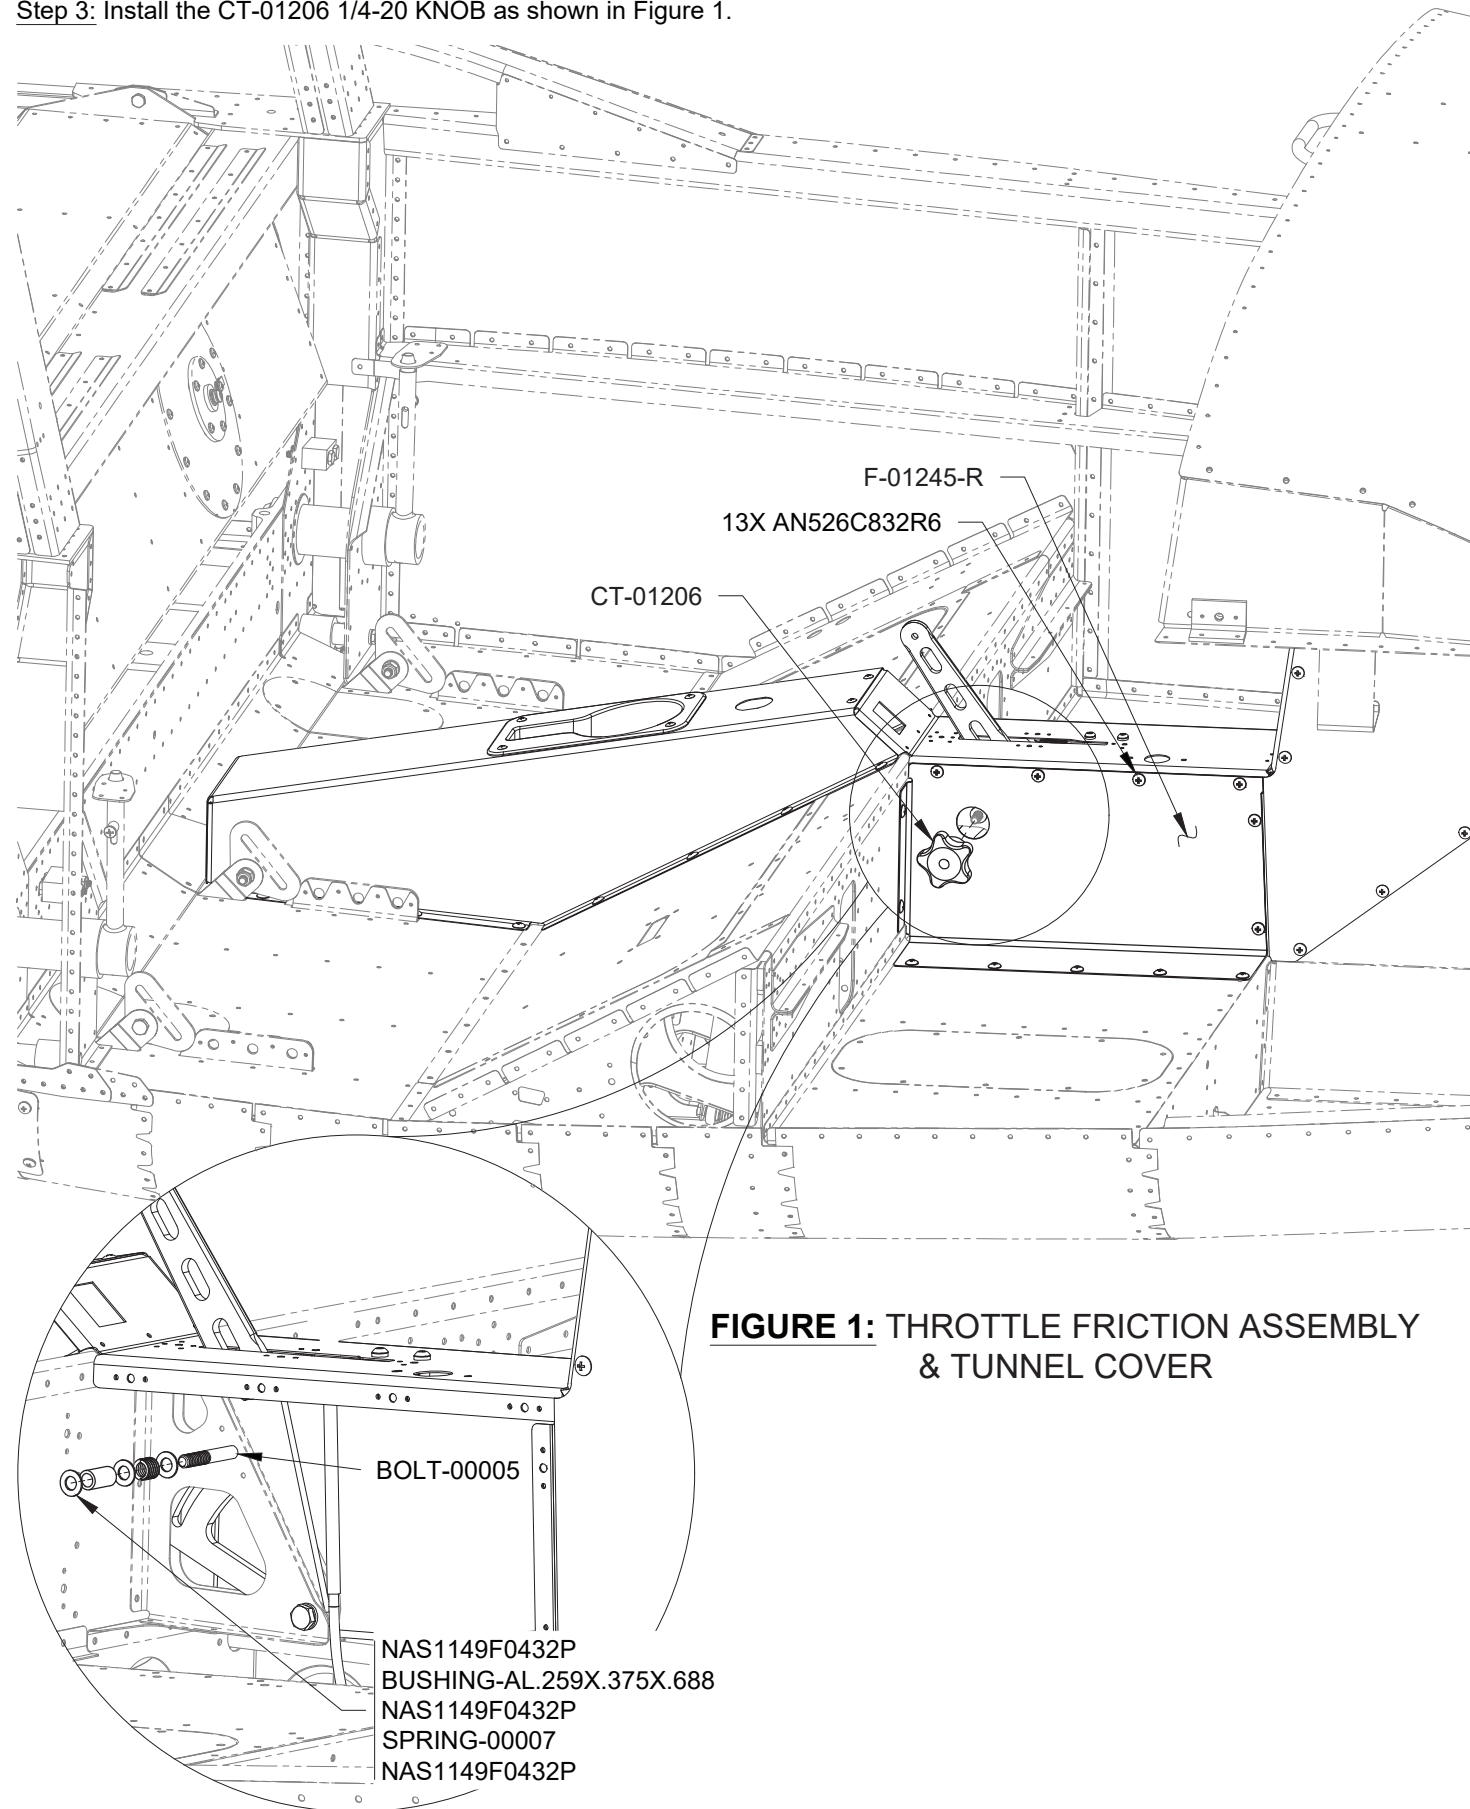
THROTTLE FRICTION ASSEMBLY & TUNNEL COVER
